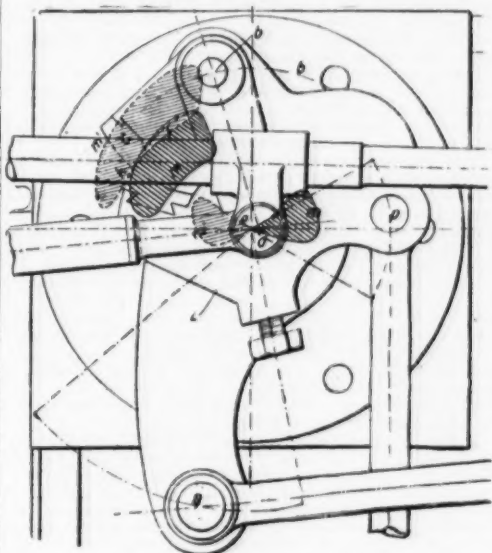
ENLARGED VIEW OF PART OF FIG. 2.
